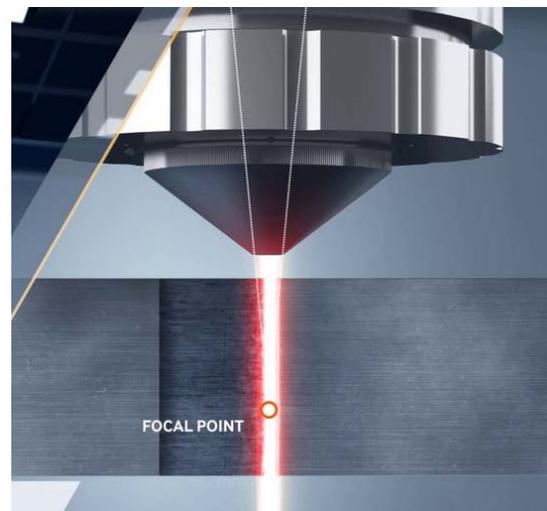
Fiber laser focal point and standoff between cutting head and workpiece [2].
